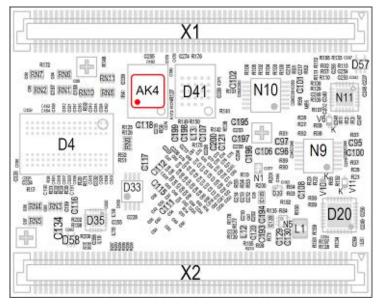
TQMLS1028A assembly revision 02xx, bottom
